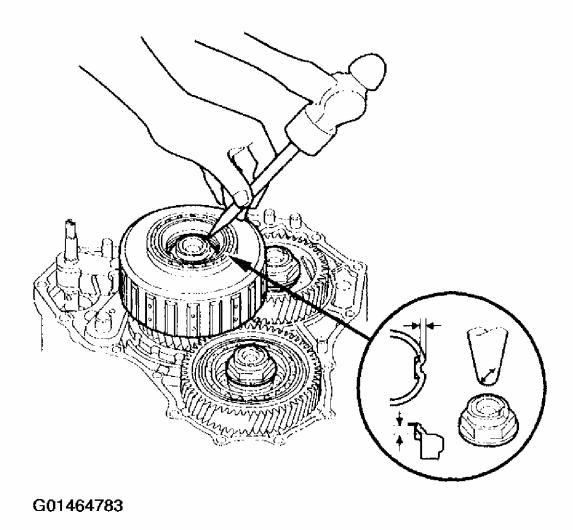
Staking The Locknut Courtesy of AMERICAN HONDA MOTOR CO., INC.
